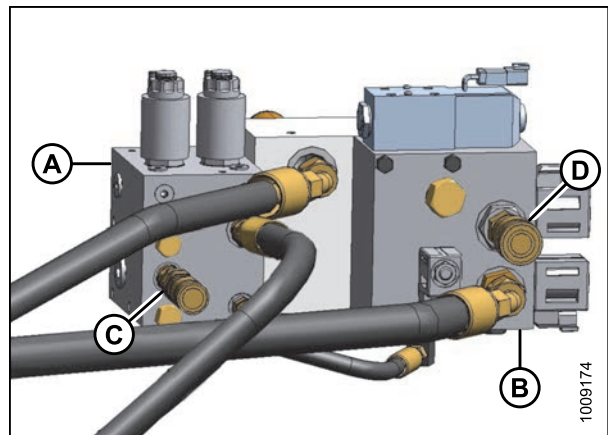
Valve Blocks with Reverser Valve Configured for Auger Header
